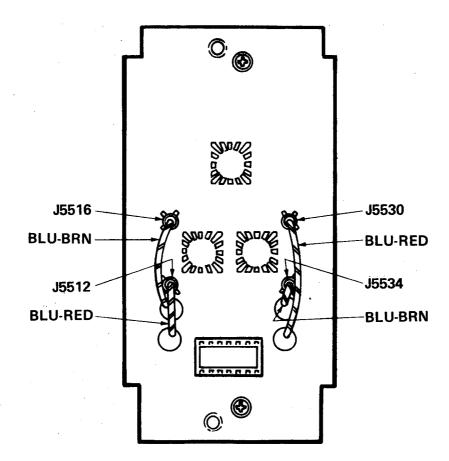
Coaxial cable connections for the 'A' Trigger Selector circuit board.
